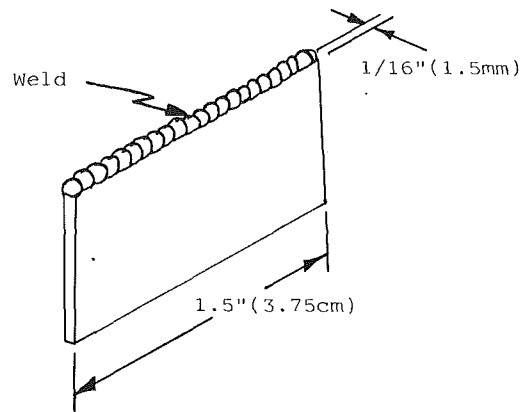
Sketch showing the geometry of IN738LC samples used in welding trials; welds were prepared along top and bottom edges
